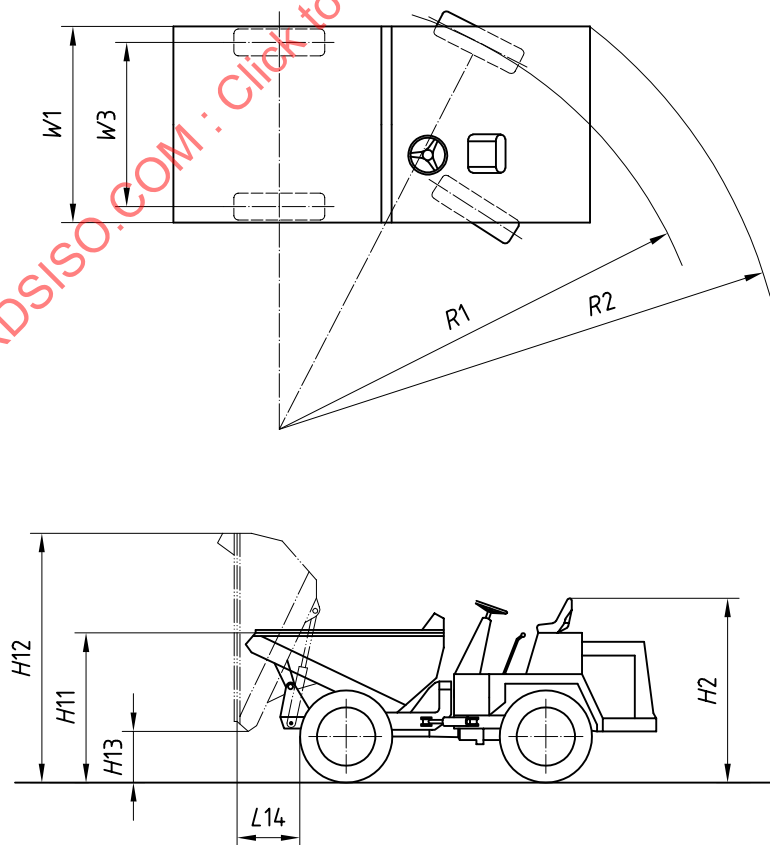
Dimensions of wheeled compact dumper — Four-wheel
